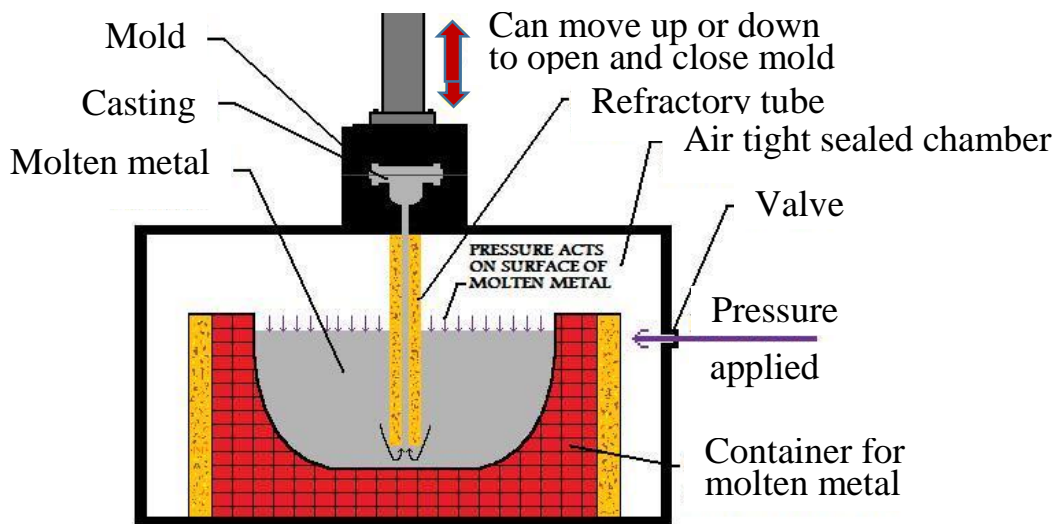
The force of the pressure causes molten metal to fill the mold pressure is applied during the solidification of the casting
